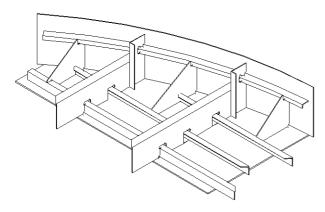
Shape of the new section Slika 5 Oblik zamjenske sekcije
